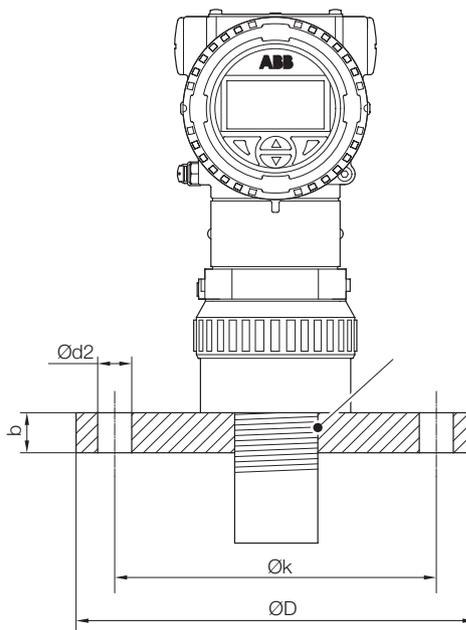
Mounting with DIN2527 flange with 1.5" and 2" NPT thread
